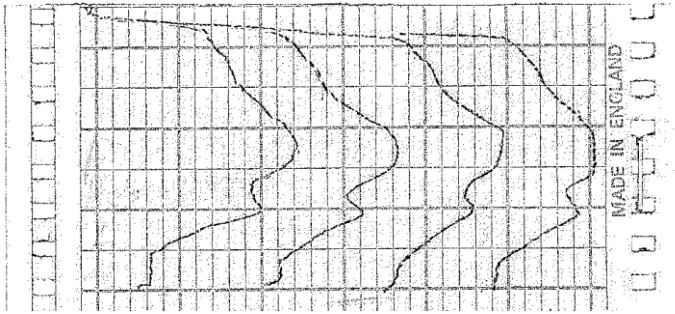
Gear profile of 4 teeth of Gear A manufactured on gear hobbing
